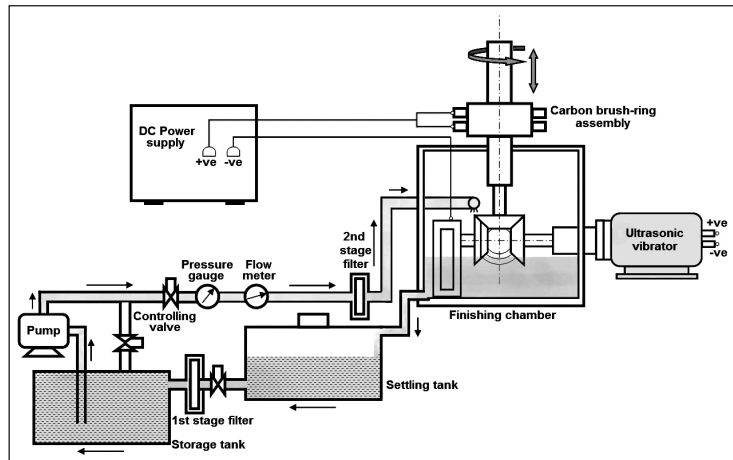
Schematic View of the UVECH Setup used for Finishing of Bevel
